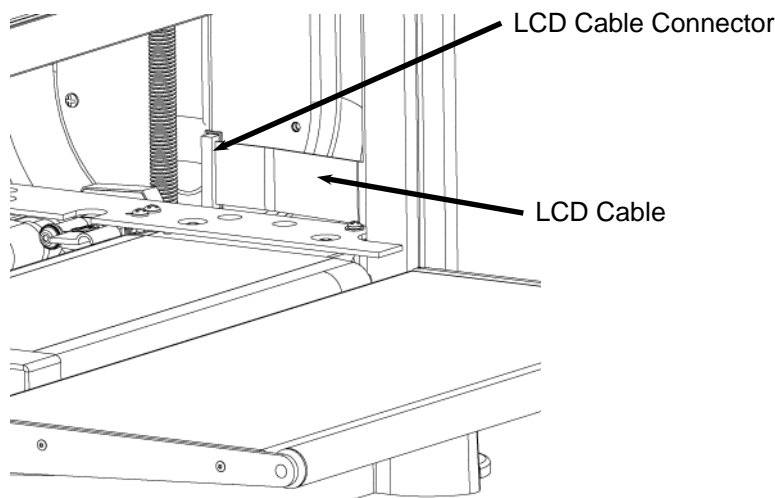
LOCATION OF THE LCD CABLE (LOOKING INTO THE MACHINE FROM THE BACK)
